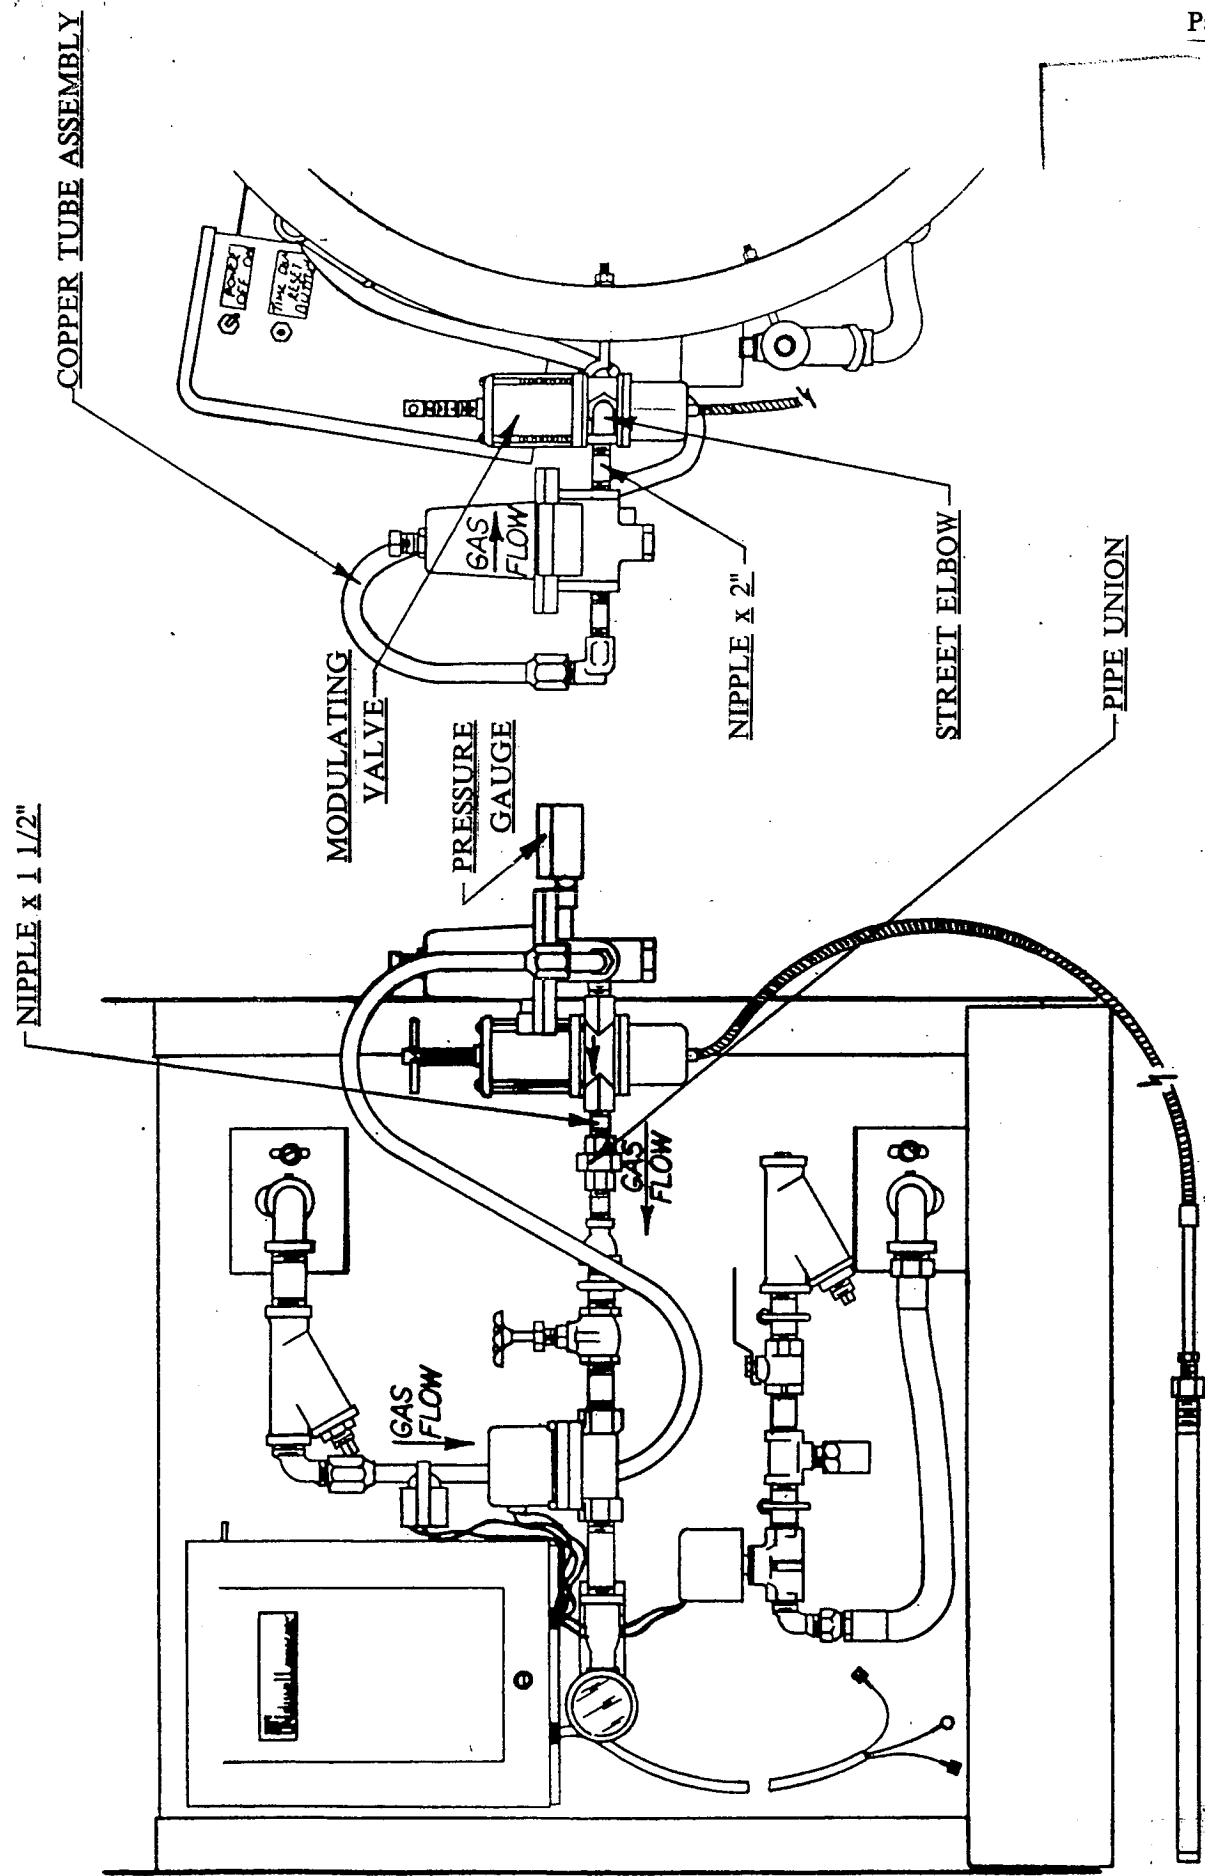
ILLUSTRATION OF MODULATING VALVE INSTALLED
